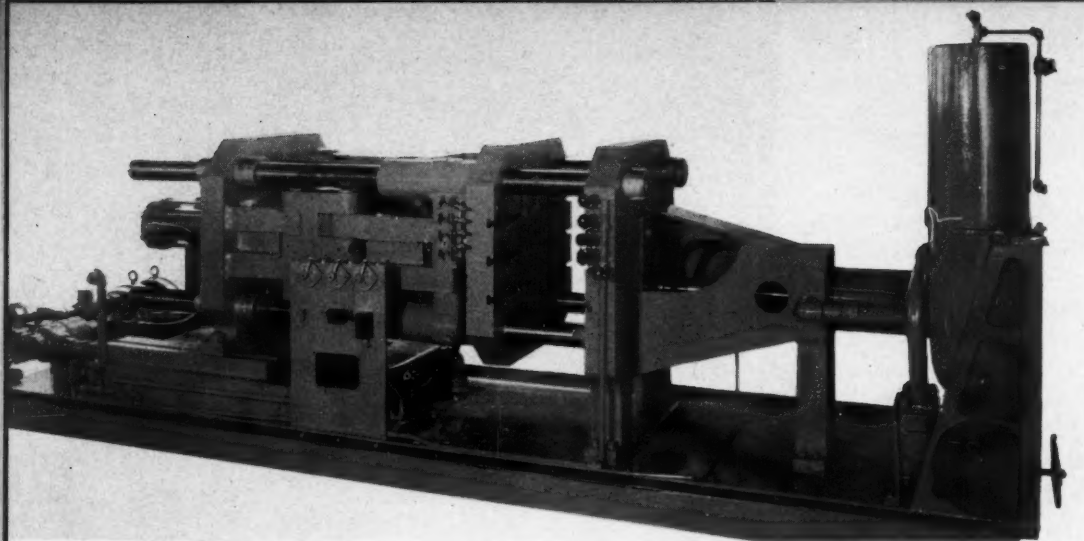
Machine for die casting aluminum alloy for airplane parts, machine gun parts, fuse casings on shells and bomb tails
